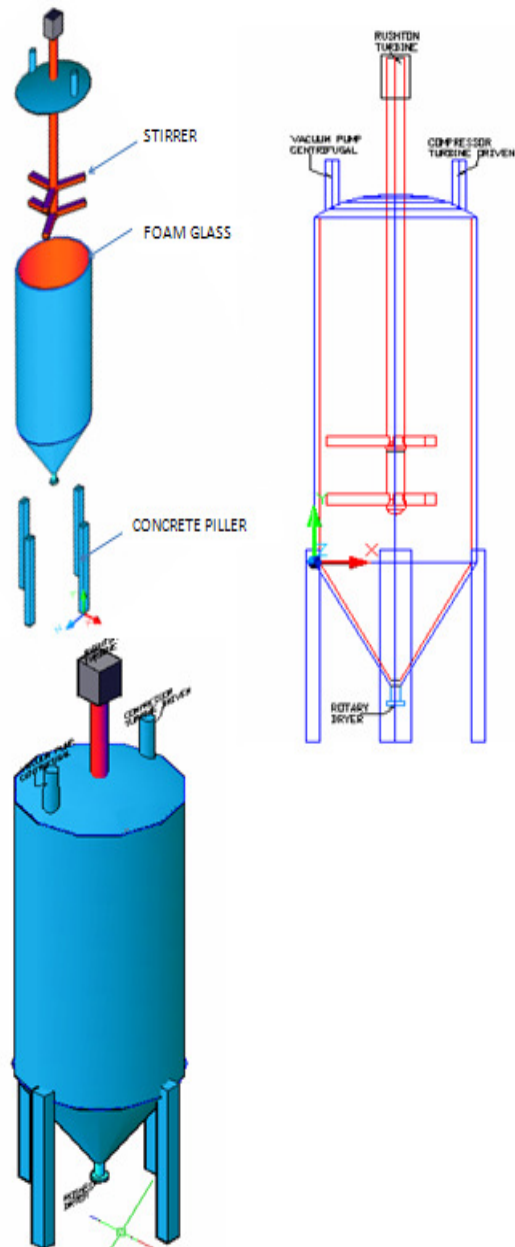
Exploded views and 3-Dimensional view of the Bioreactor
